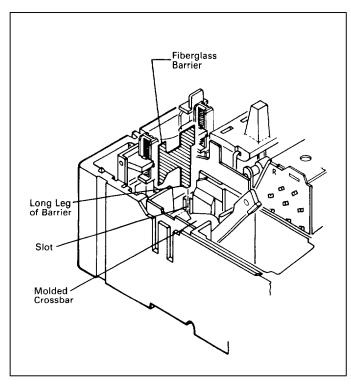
Fiberglass Barrier Installation Position (Right Accessory Mounting Cavity Shown)
